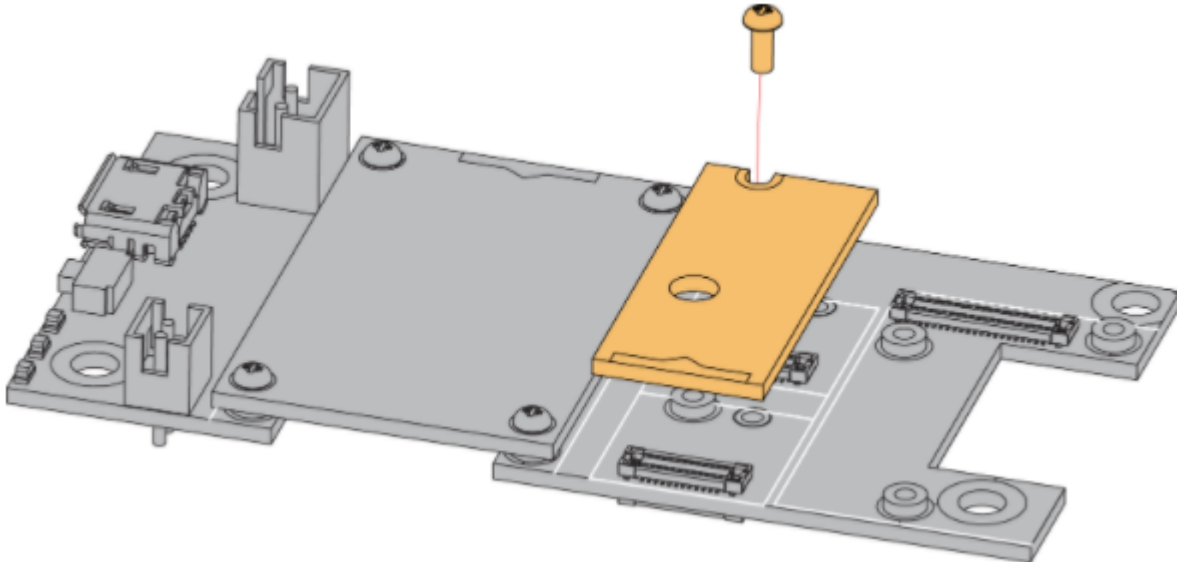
RAK12001 WisBlock Fingerprint Sensor Module Mounting
